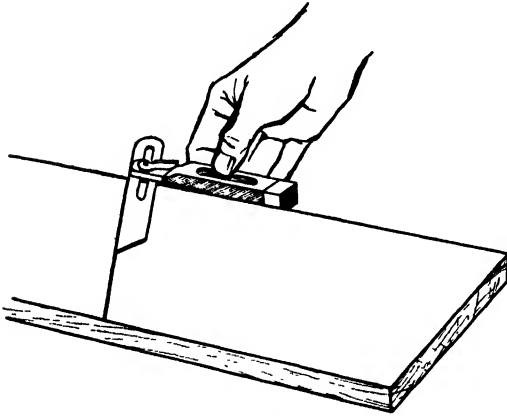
The bevel is used for laying out and checking angles and bevels.
